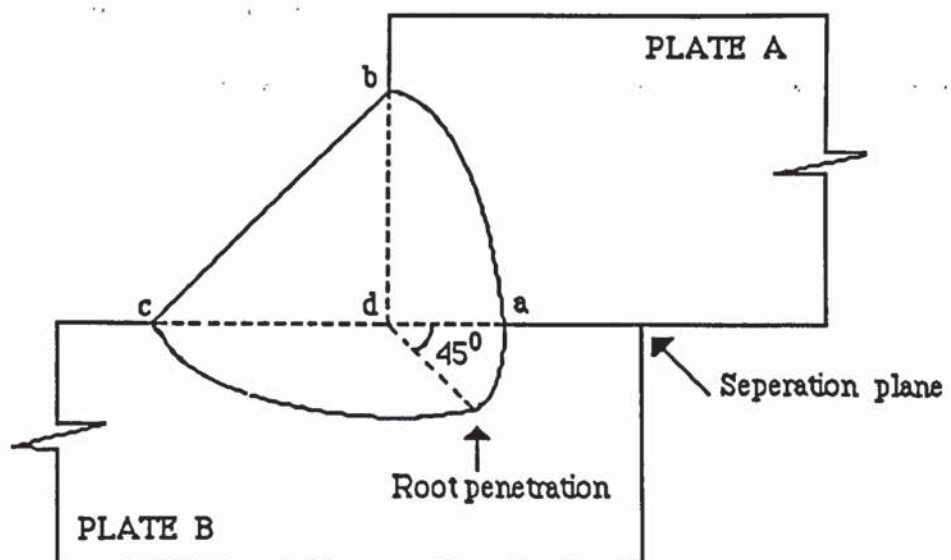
The actual fillet weld profile in a welded connection.
